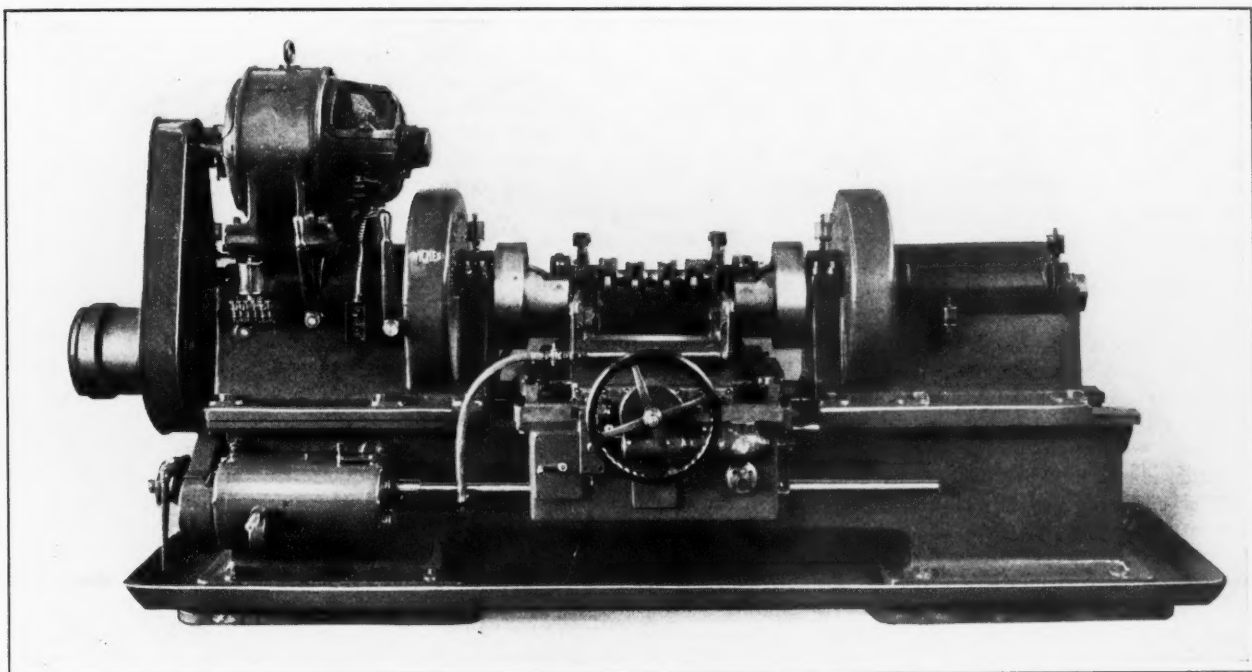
Wickes Duplex Crankshaft Lathe which machines Two Pins simultaneously
